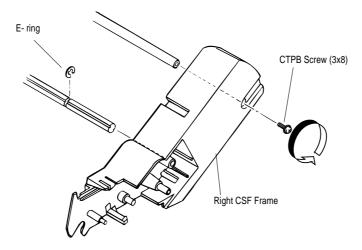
Removing 1 E-ring and 2 CTBS Screws
